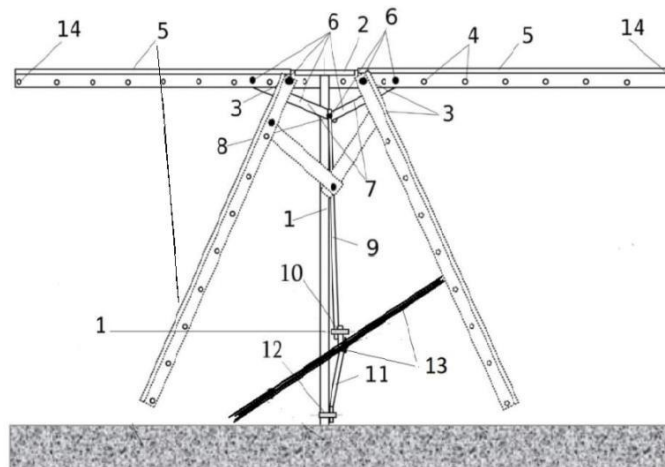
Technical drawing of the T-shaped Mobile Pergola Trellis
